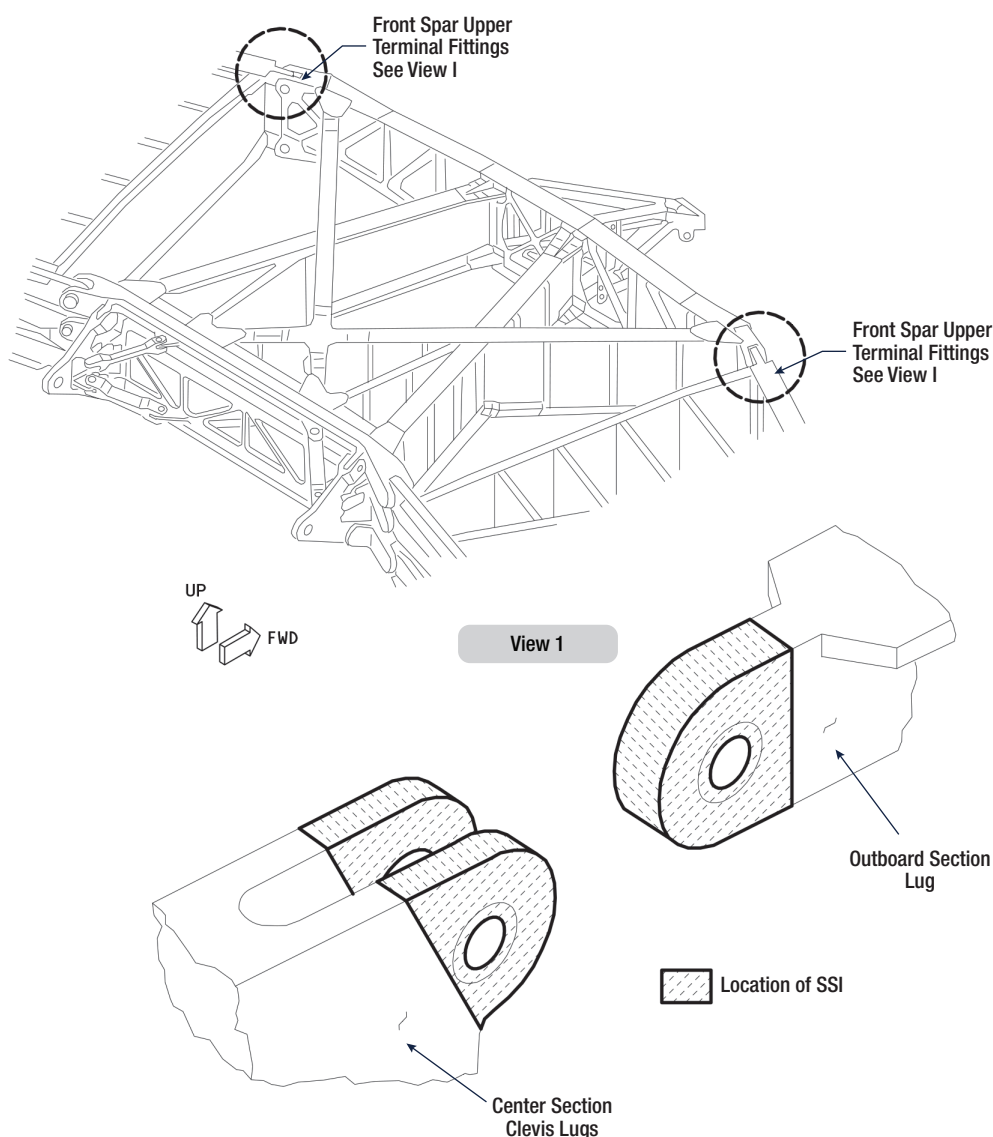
Horizontal stabilizer center section outboard front spar terminal fitting lugs.
